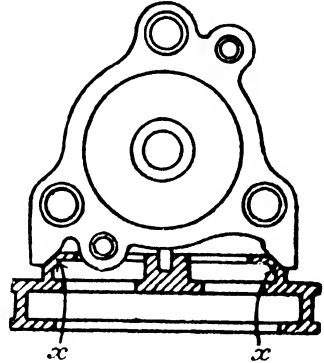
Press-head carried on bevelled surfaces which intersect at axis of container.
